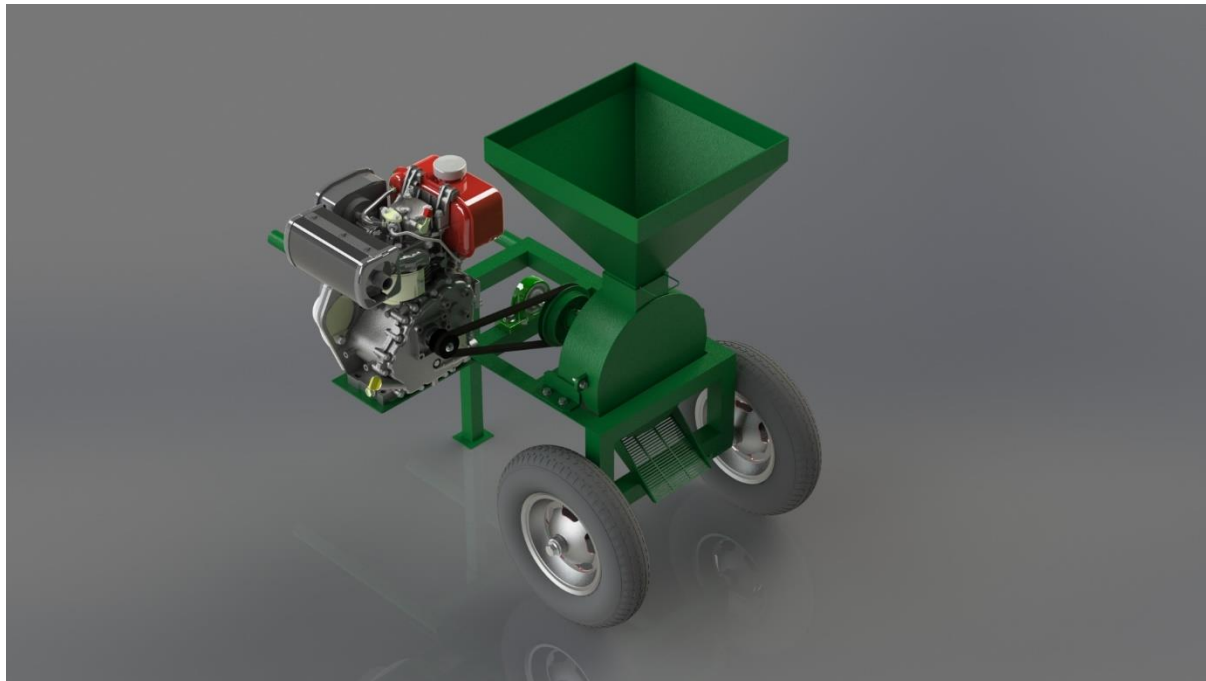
Three dimensional model of the developed palm kernel nut cracking machine
